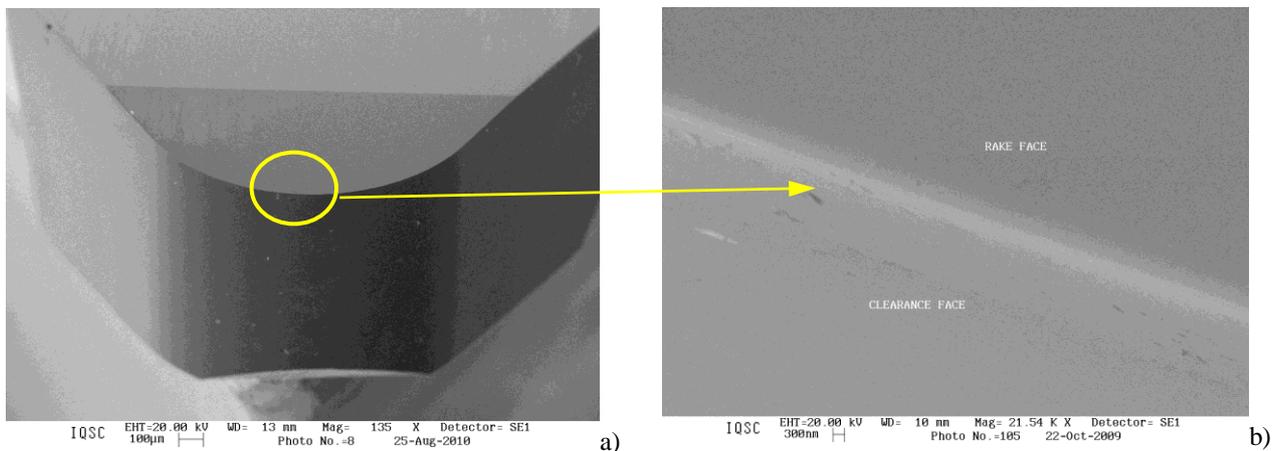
SEM image of diamond tool with  $0^\circ$  rake angle used in the cutting tests; a) general view of the cutting tool; b) detail view of the cutting edge with no detected wear.
